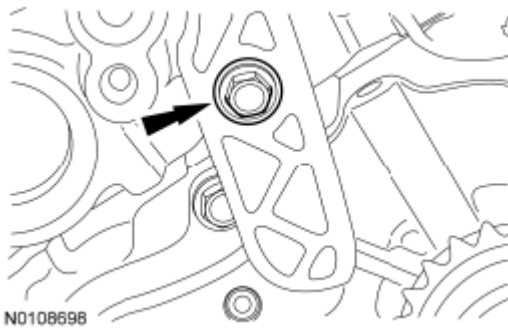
Locating RH Primary Timing Chain Guide Lower Bolt
